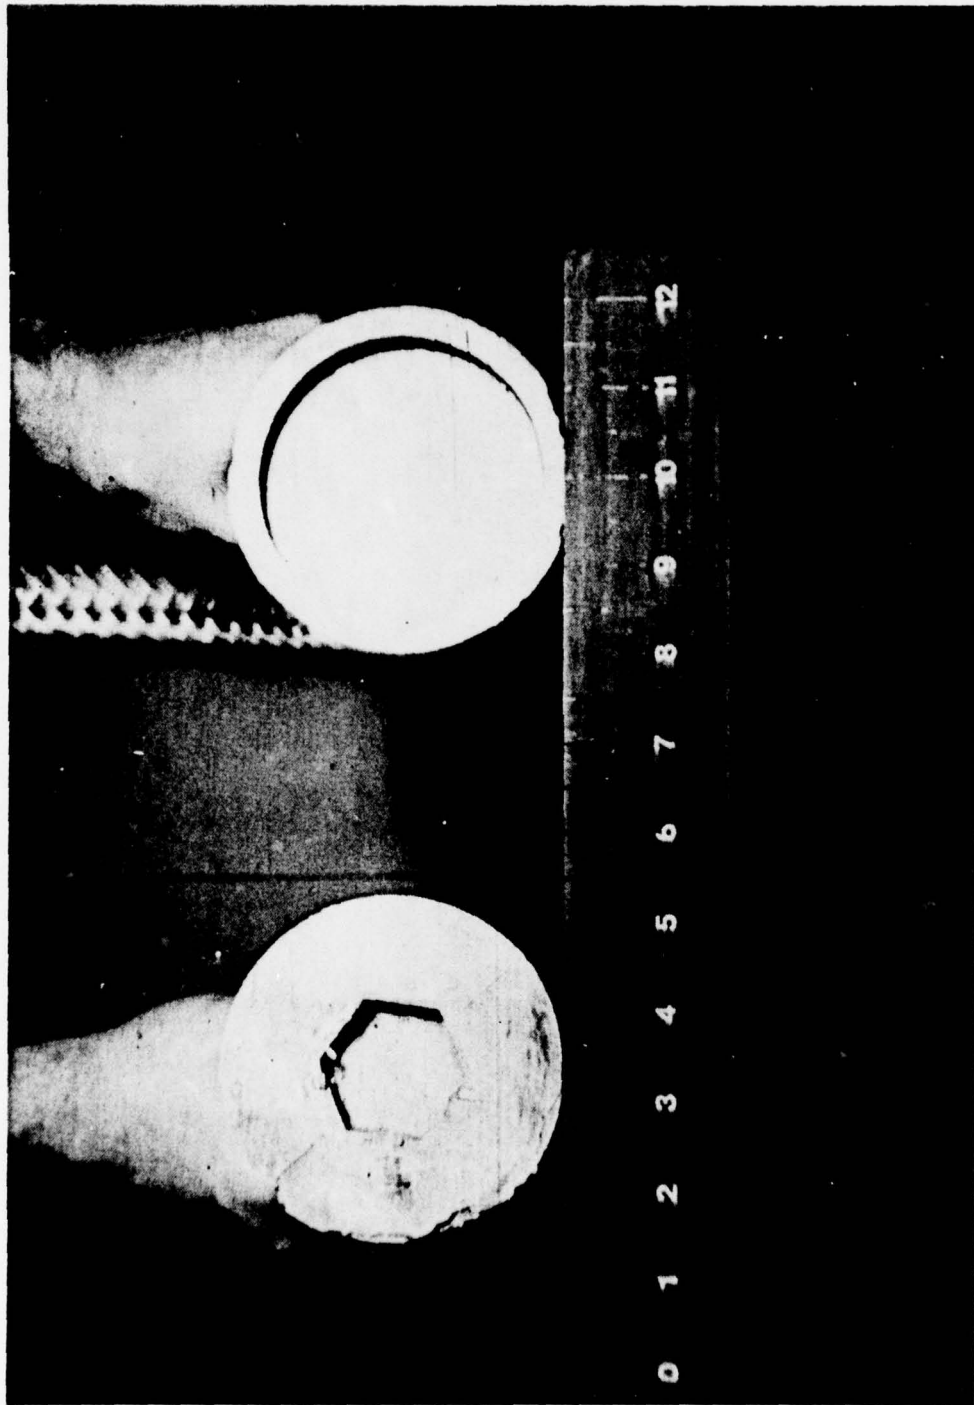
PHOTOGRAPHIC END VIEW OF EPOXY CASTING FOR ATTACHMENT INTO LOAD FRAME
